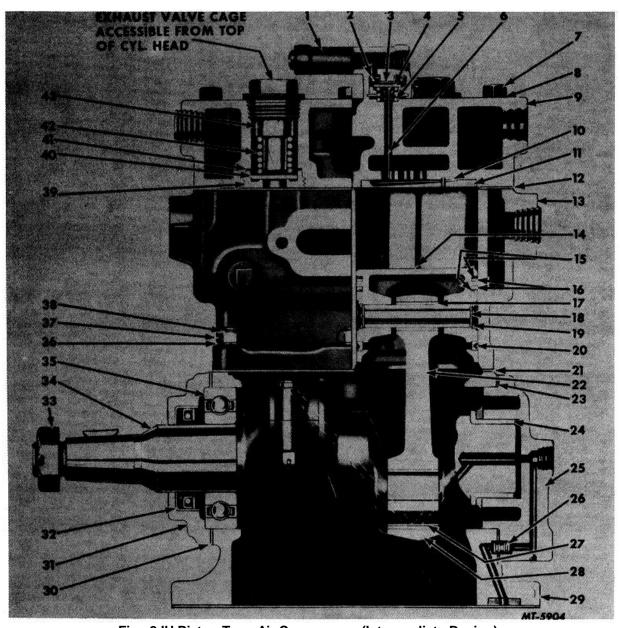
IH Piston Type Air Compressor (Intermediate Design)
